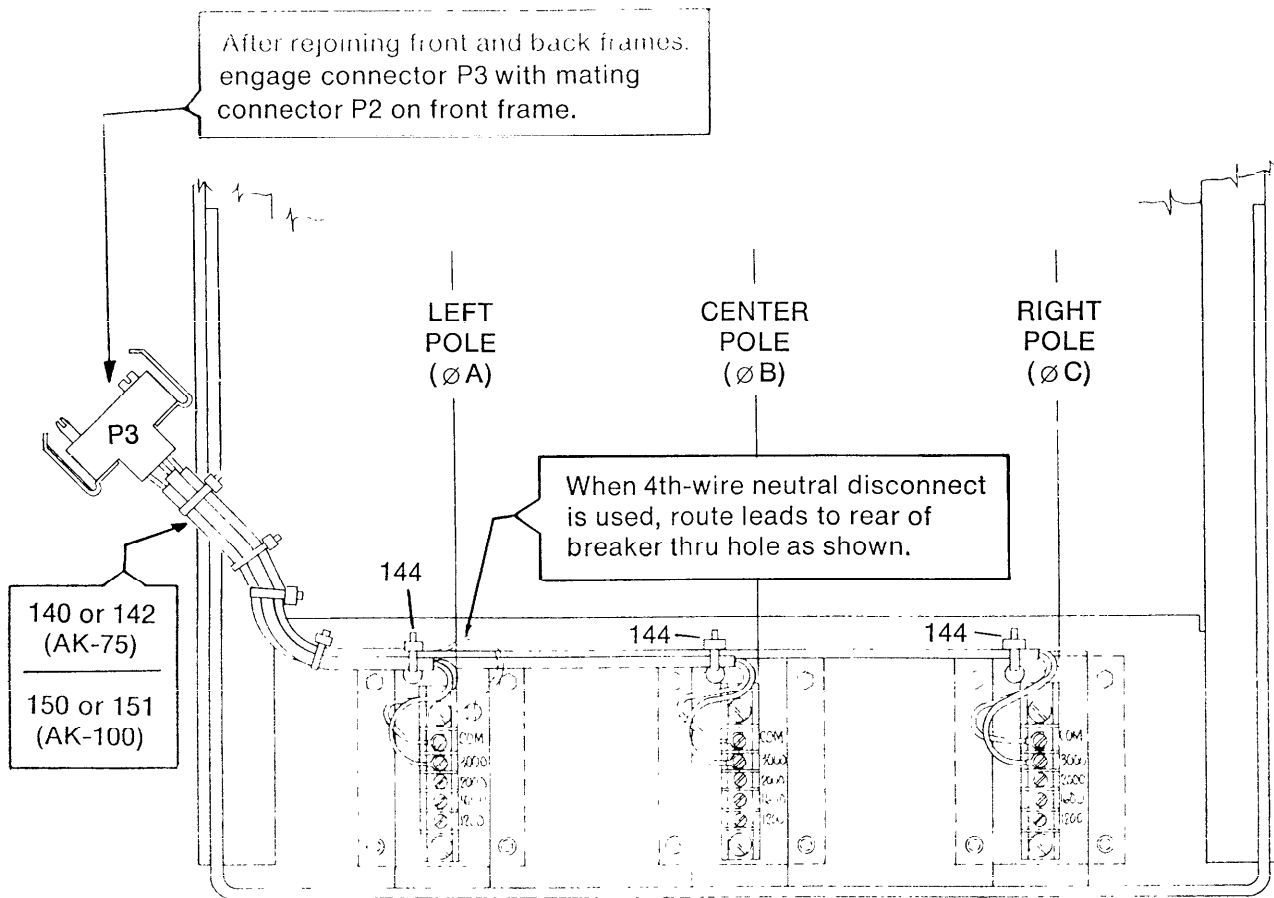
Front view of converted AK-75/100 back frame showing sensor terminal boards and harness arrangement.
